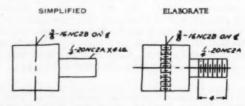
Where it is necessary to detail threads, do not carry it out completely over full length of a stud, bolt, or tapped hole.
